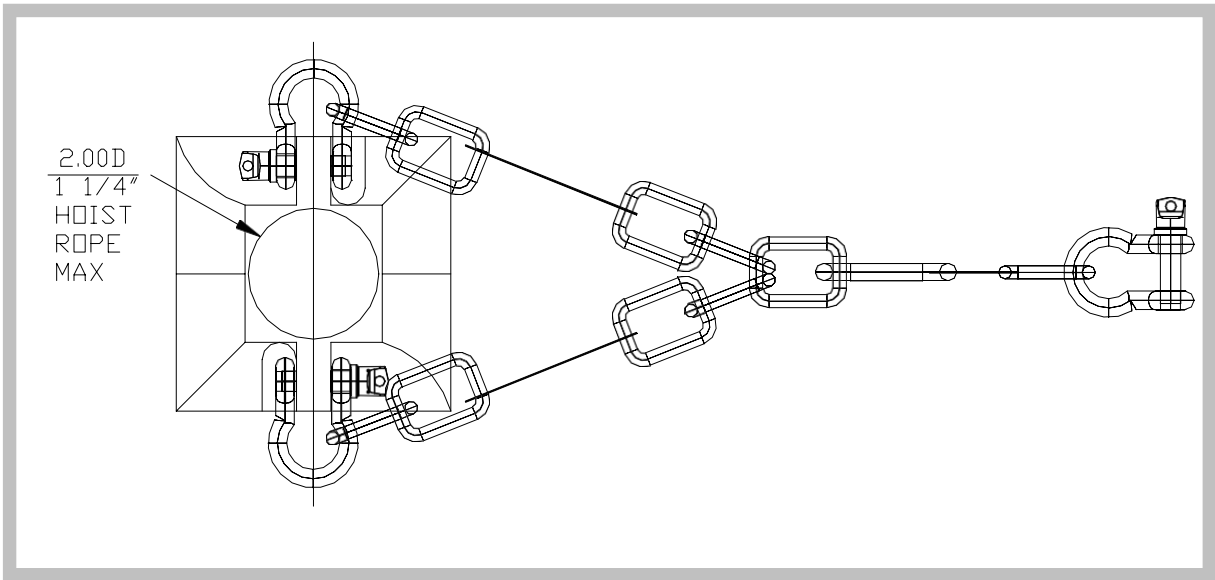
CHAIN AND WEIGHT ASSEMBLY – A251000
